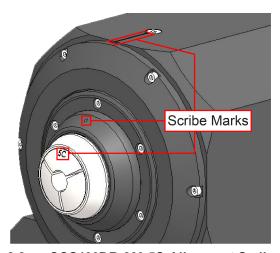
CCS190DR-260-5C Alignment Scribe Marks
